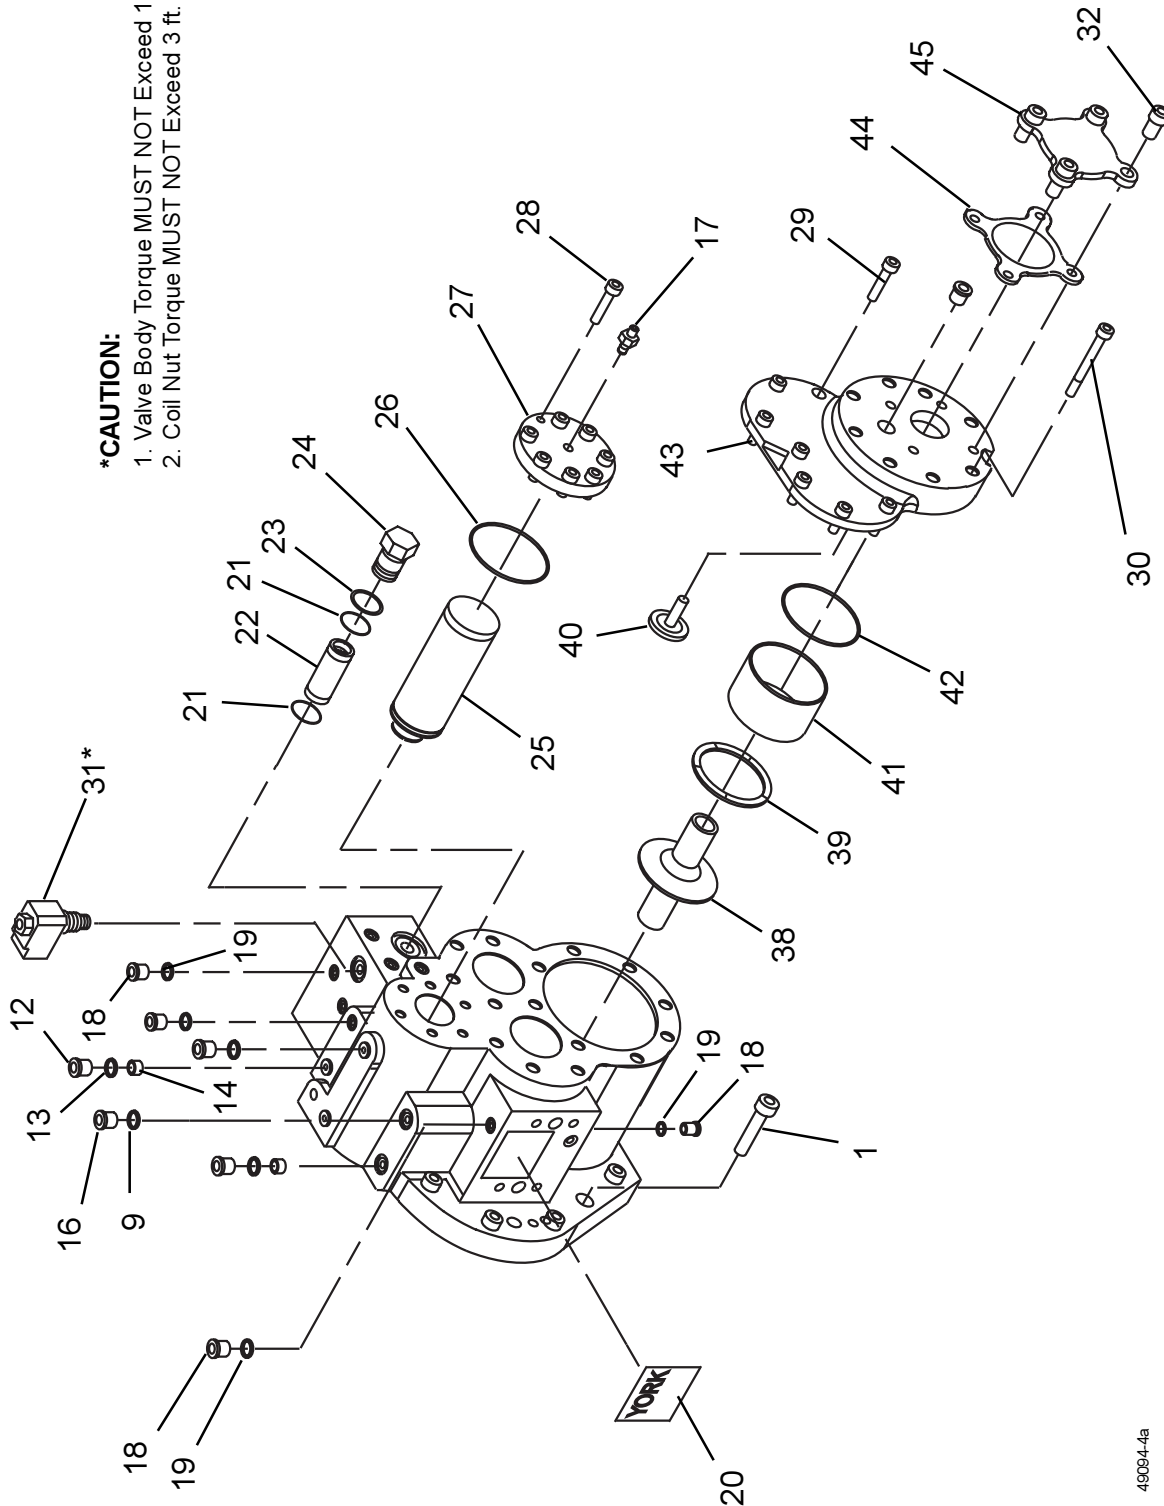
COMPRESSOR COMPONENTS - 124MM, 136MM & 145MM COMPRESSOR (REF. TABLE 5, PAGES 21 AND 22)
